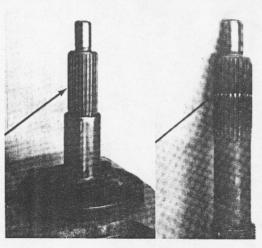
Lapping the clutch disc on the clutch gear to remove any burrs.
